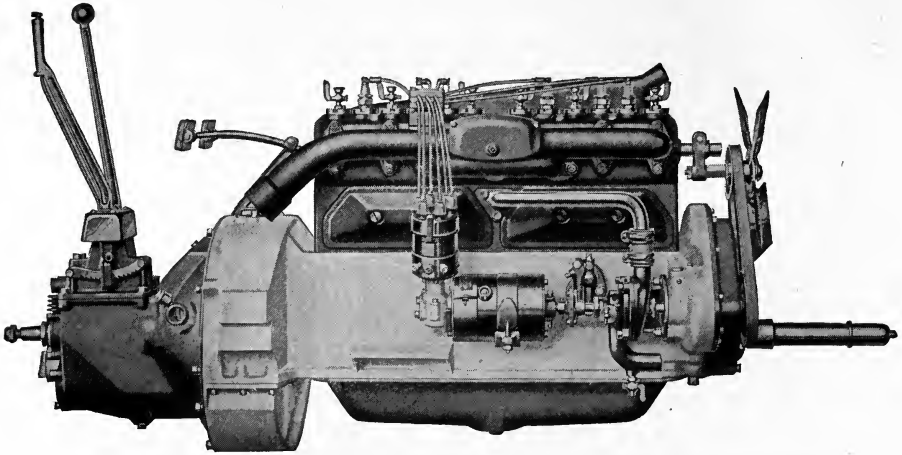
Westinghouse vertical ignition unit mounted on an automobile engine.
